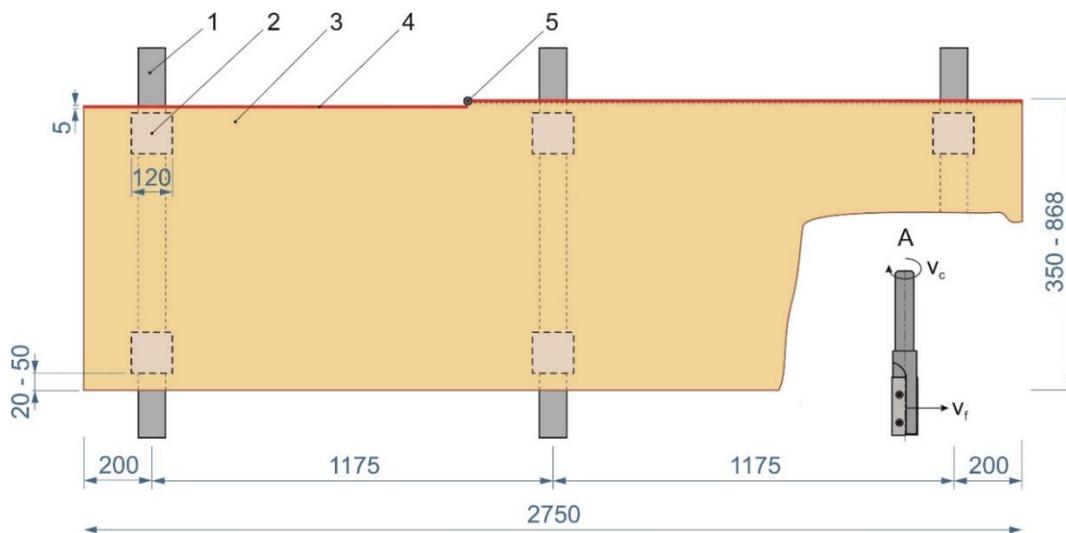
Scheme of samples preparation (1 - CNC machining center transverse beam , 2 - vacuum shoe, 3 - MDF board, 4 – sample, 5 – shank cutter, v_c - direction cutting speed, v_f - direction of feed speed, A - conventional milling).
